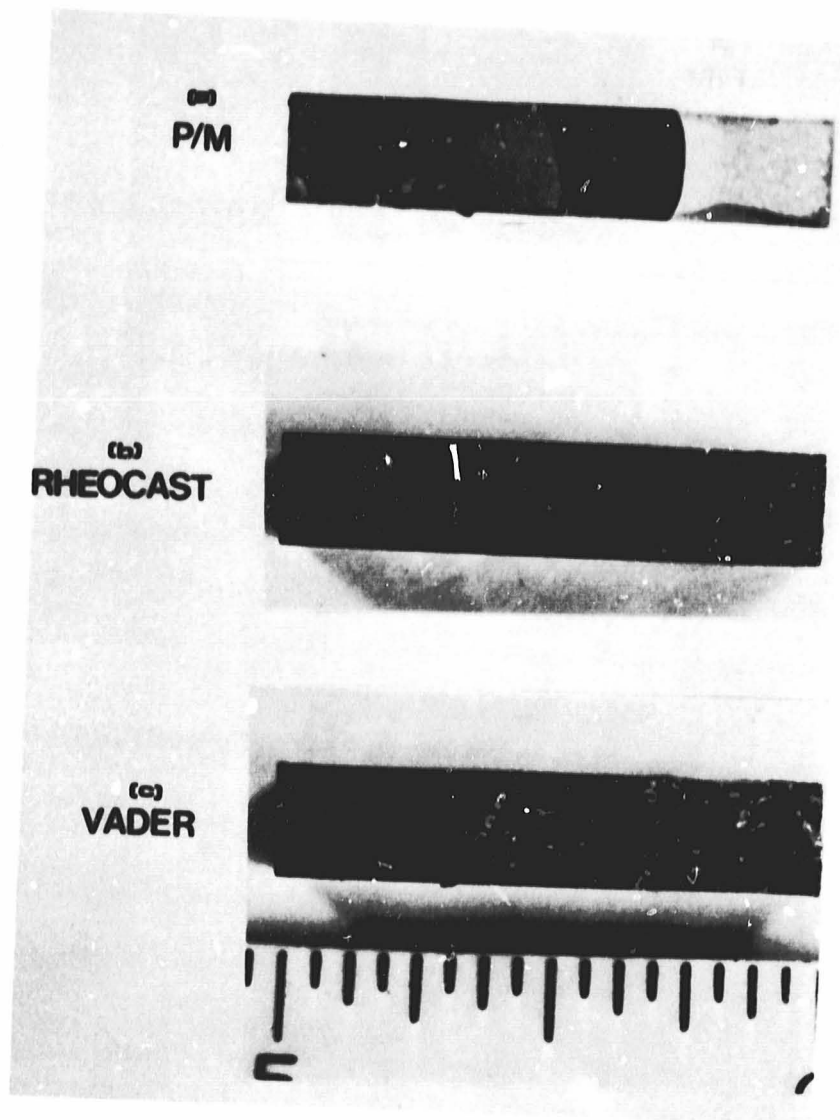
The fracture surface of the CT specimens. (a) P/M; (b) rheocast; (c) VADER process.
